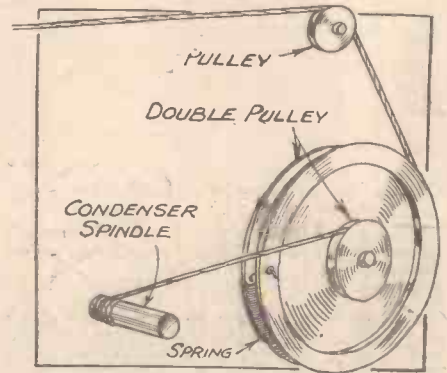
A suitable geared drive may be constructed as shown in this illustration.
